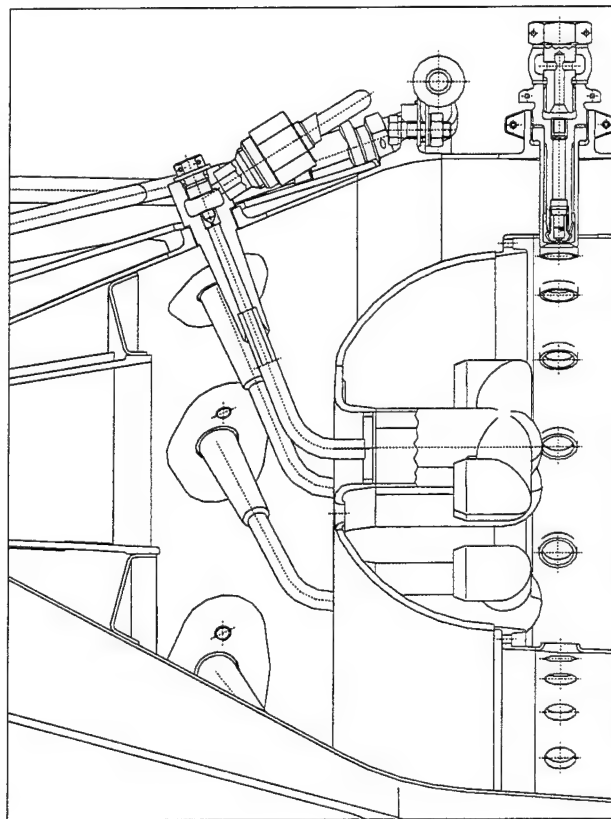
Head of the flame tube with main fuel injectors - annular vaporizing combustion chamber of a Polish jet engine K-15.
